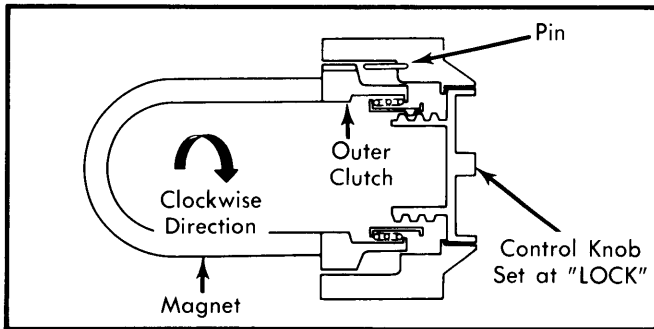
Using a Magnet to Remove Datsun Outer Clutch
